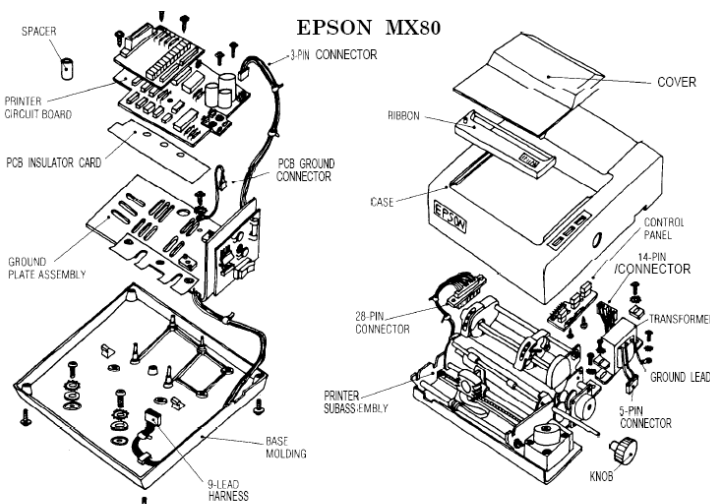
The EPSON MX80 dot matrix printer final assembly consists of 49 parts or subassemblies as shown in this exploded view.
